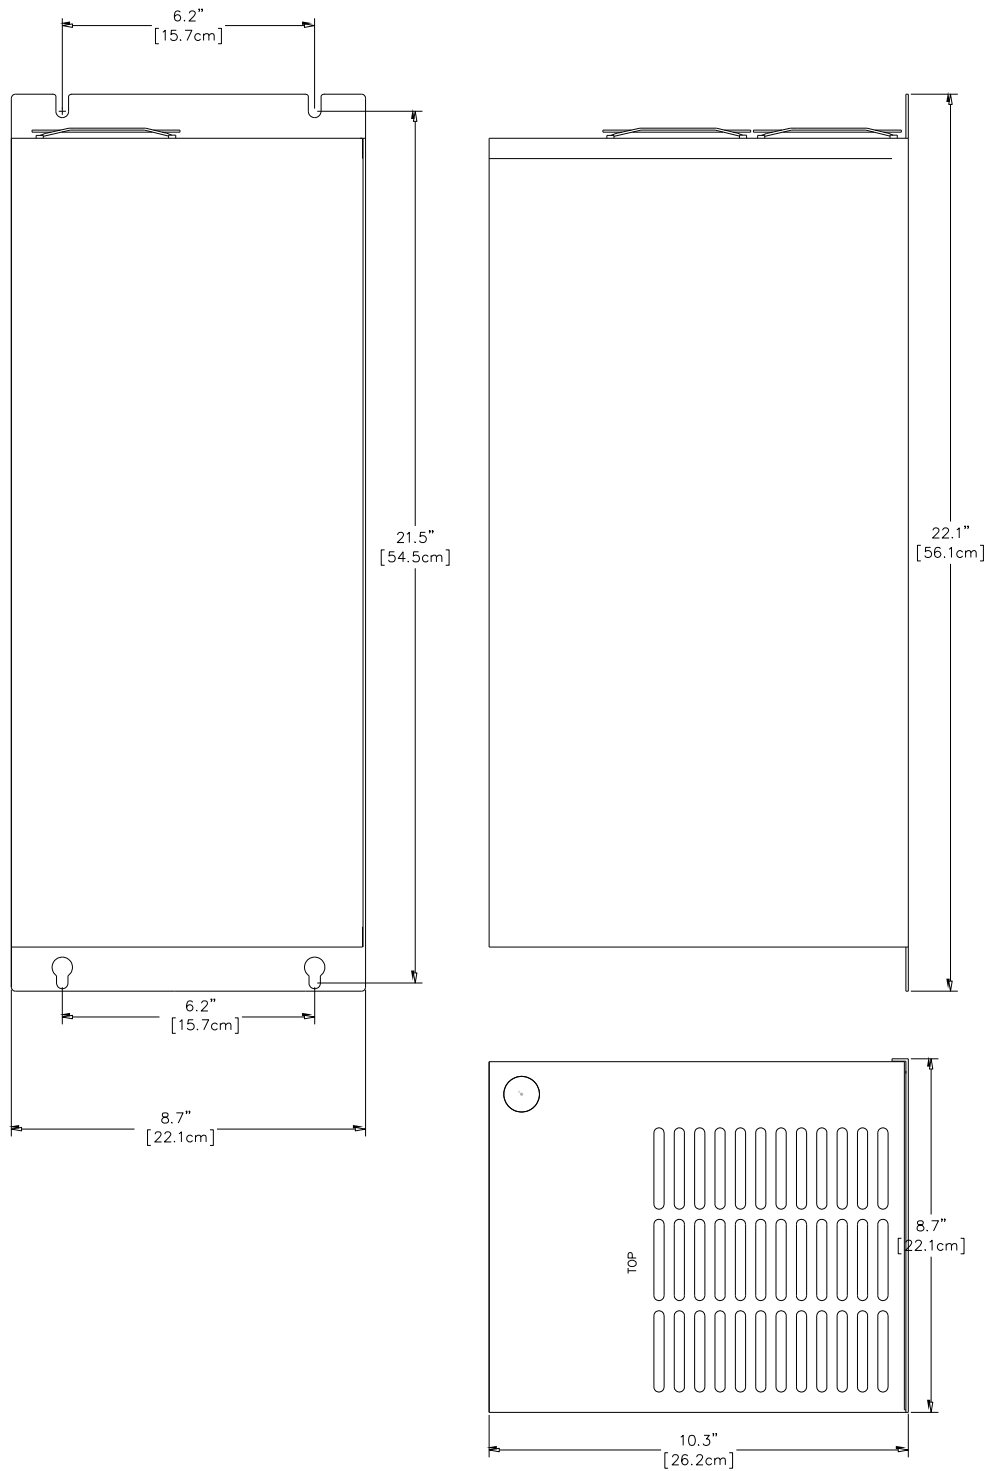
M3534R 50kW A9 Chassis Dimensional Outline
